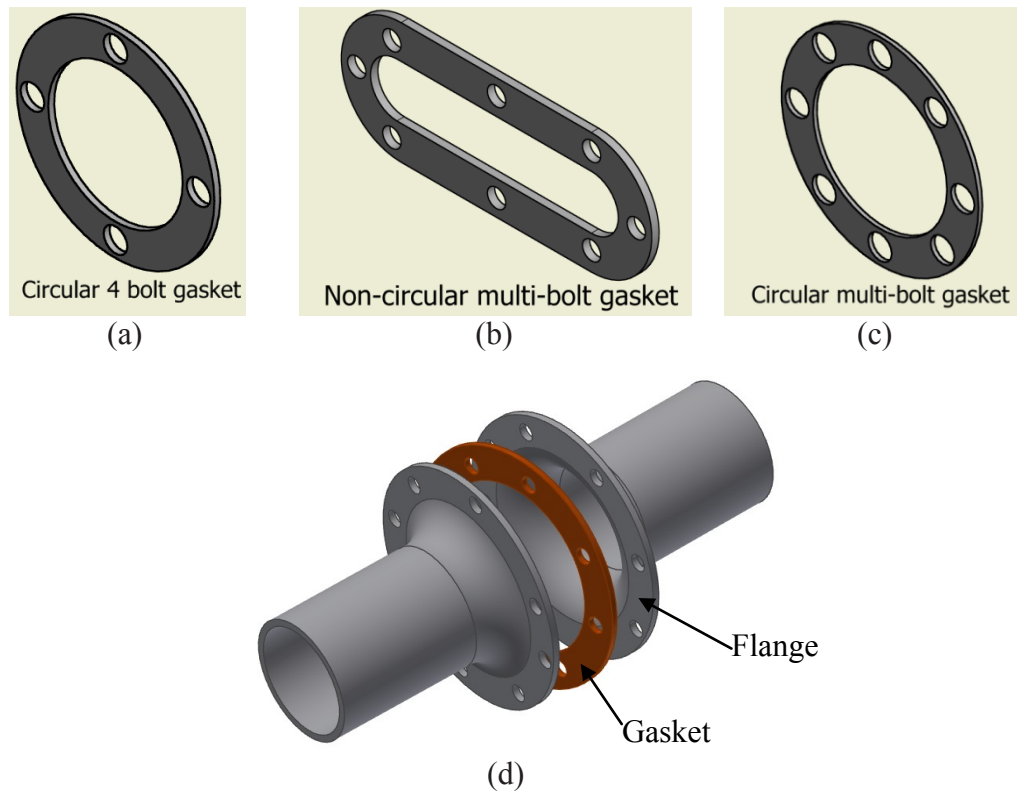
(a), (b), (c) Types of Gasket and (d) Gasket assembly [2]
